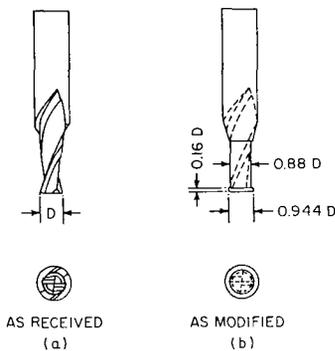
End mills as modified by grinding so that only the flat end did the cutting while the sides (to a height $0.16 D$) provided a self-bearing feature to control the hole diameter and to eliminate taper in the hole
